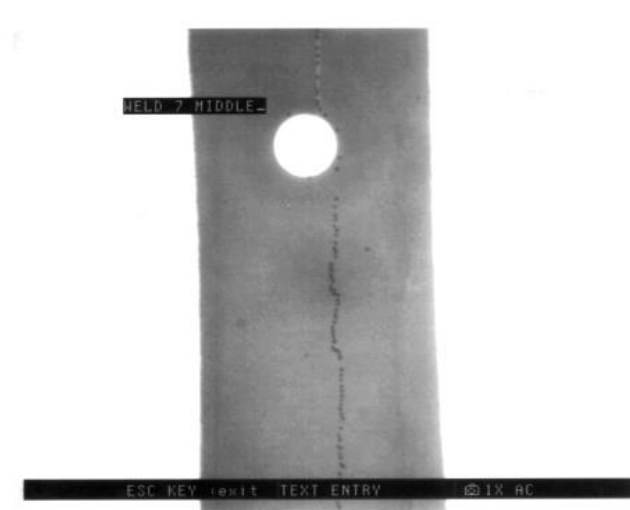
Radiograph of 6061-T6 Butt Weld Revealing Dispersal of Steel Shot Tracer Around Tool Probe (Visible Hole) [5]
